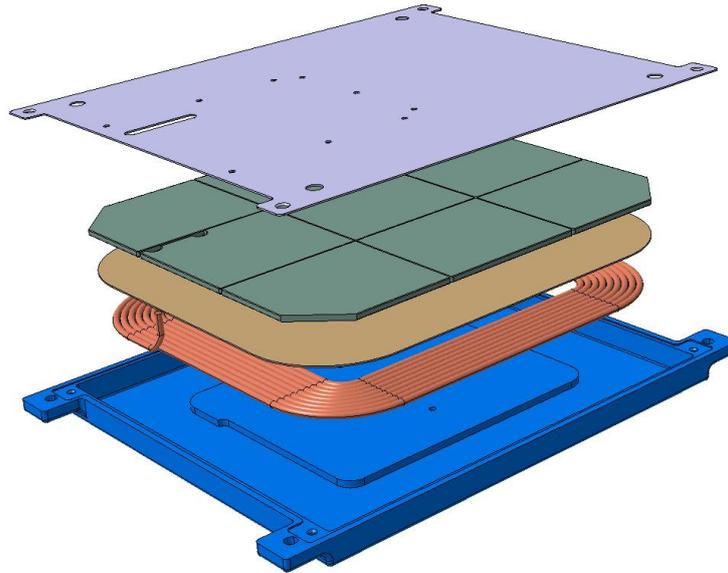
Principle design of secondary coil (top to bottom: alu plate, ferrite, bobbin (glue), coil, housing)
